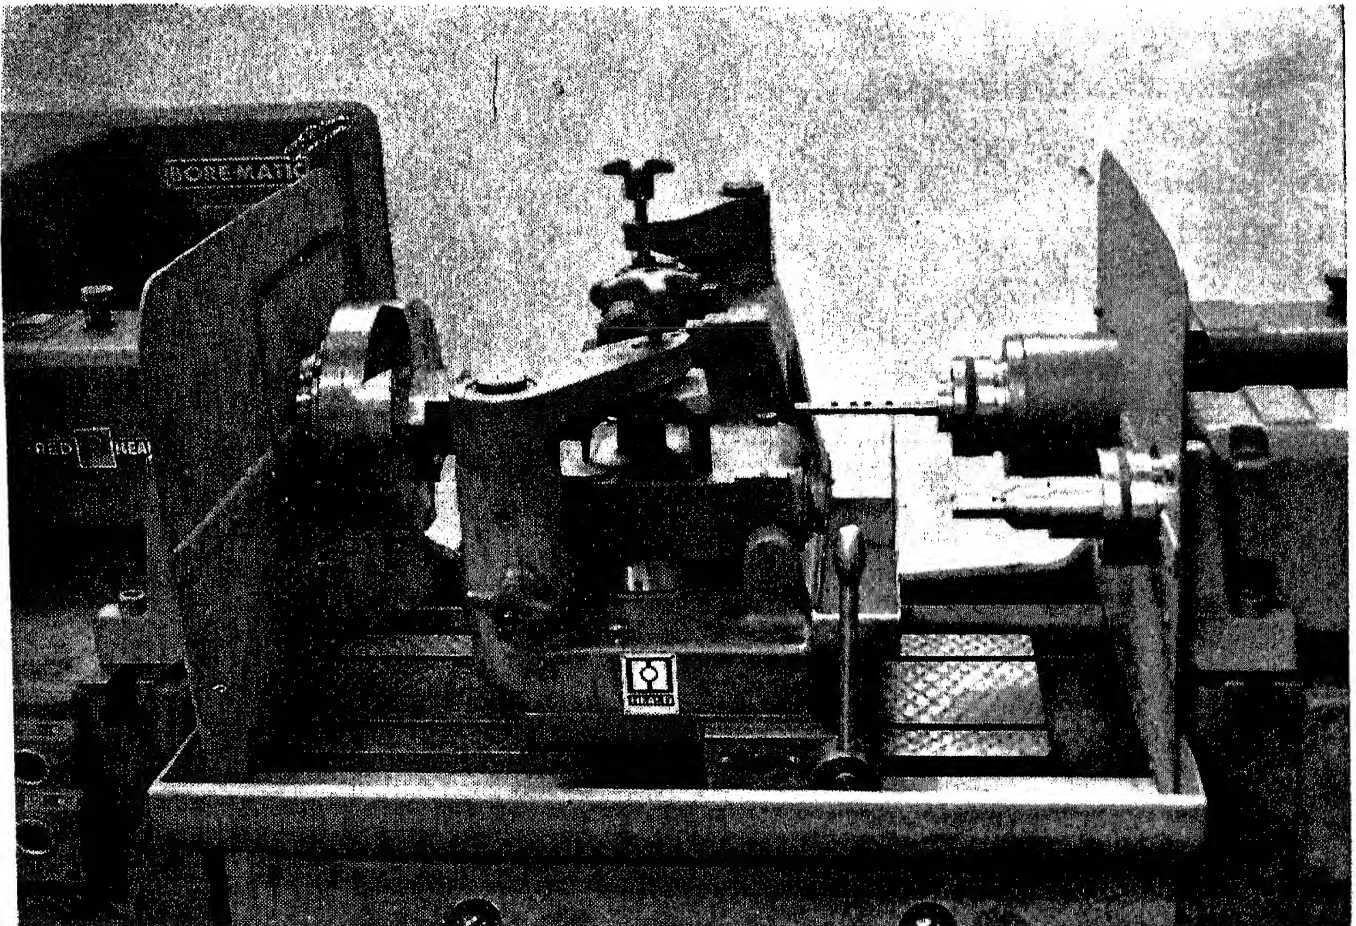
A view of the work station of a double end horizontal precision production boring machine with tooling for machining 10 surfaces on a pump body. (Courtesy The Heald Machine Co.)
